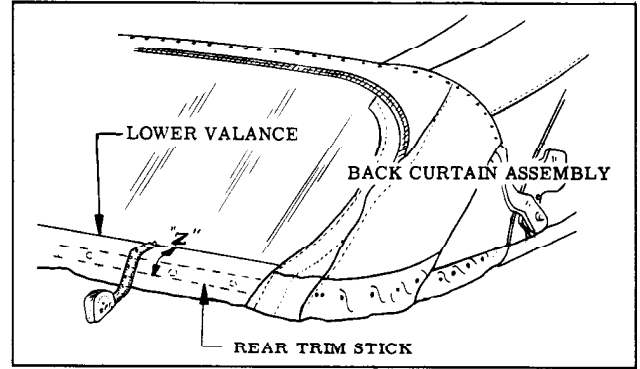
Check Trim Stick to Lower Valance Dimension
